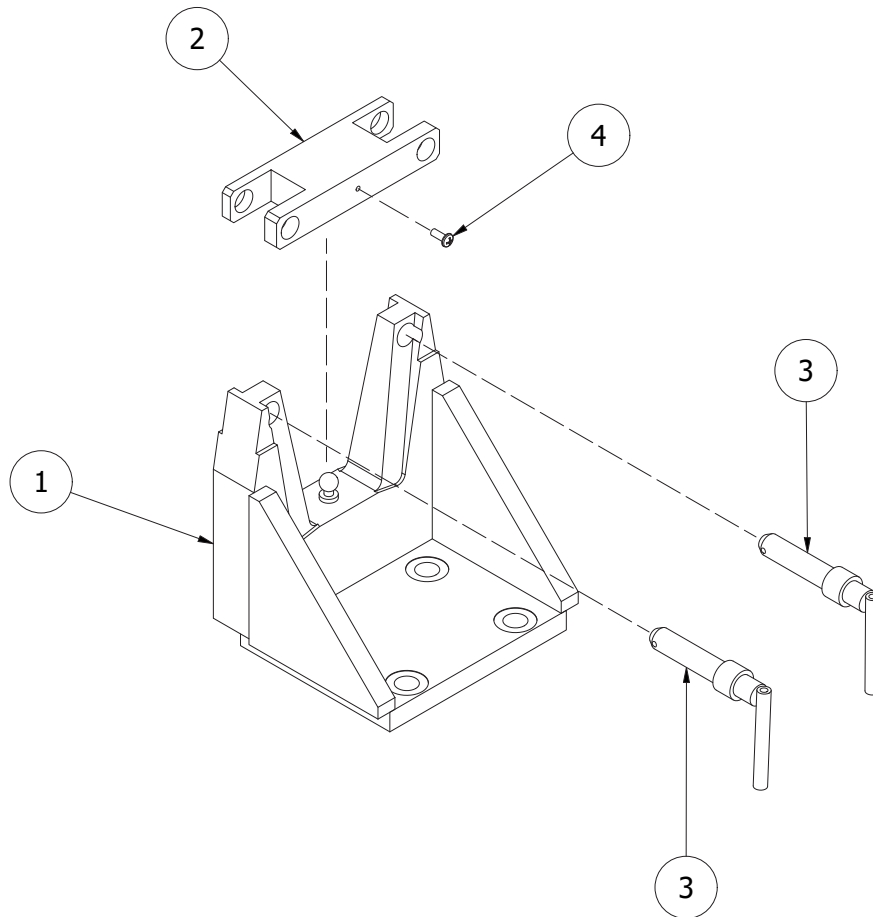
AGSE-E20329-S01 AFT Mount Base Assembly
